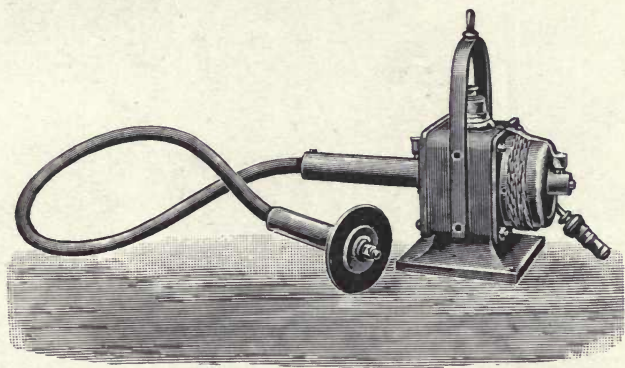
Naxos Union Grinding and Polishing Motor with Flexible Shaft.
